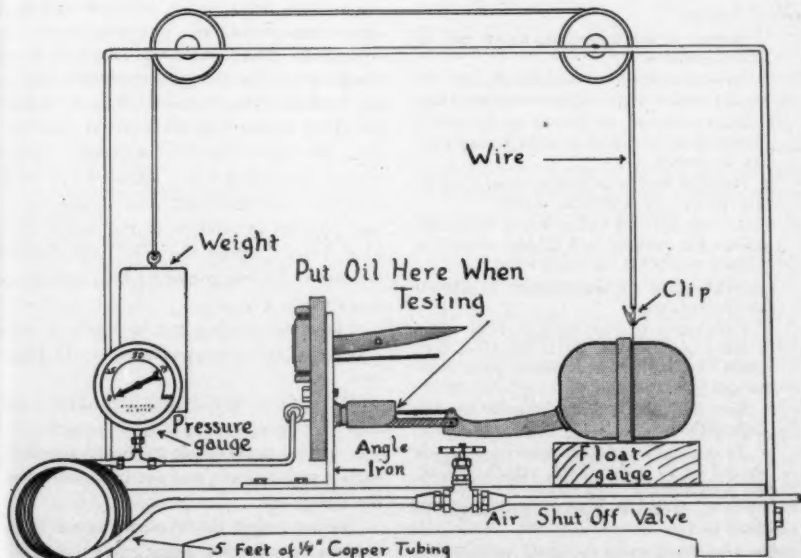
DETAILS FOR MAKING FLOAT VALVE TEST OUTFIT
